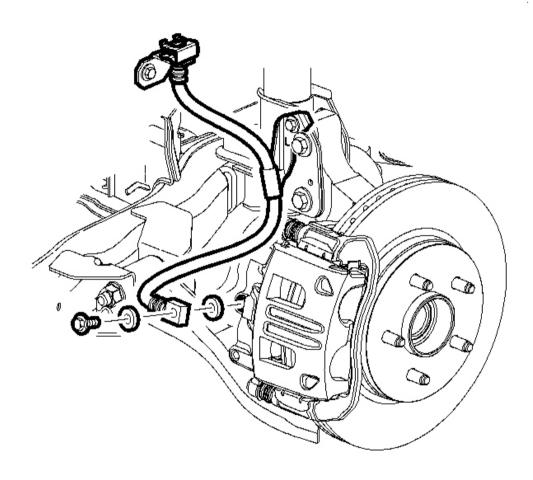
Removing/Installing Copper Brake Hose Gaskets Courtesy of GENERAL MOTORS CORP.
